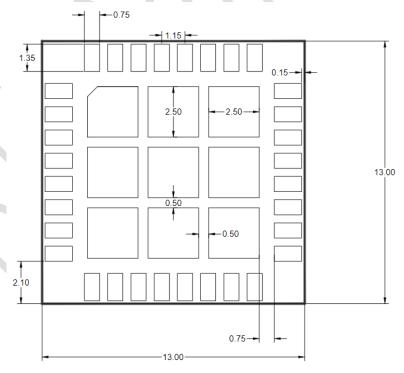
RECOMMENDED PCB FOOTPRINT FOR SHIELDED HTNB32L-XXX.
